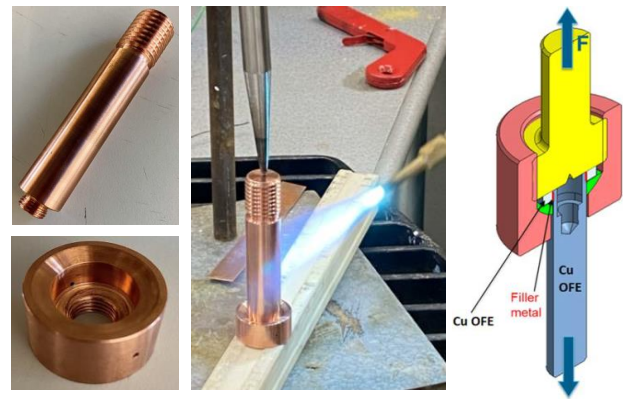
Left: Shear sample, diameter: 16 mm, Center: brazing process, Right: Tensile test of shear sample
